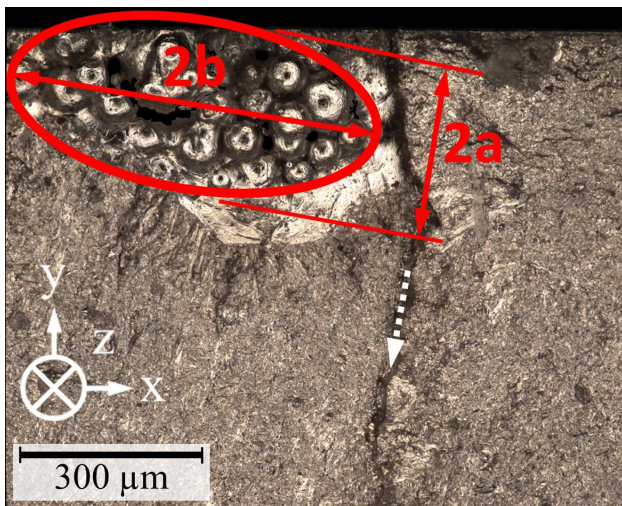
Characterisation technique used to quantify defect size at crack initiation sites based on approximate elliptical geometry of dimensions a, b . Crack propagation direction is indicated by the dotted white arrow. (Fracture surface shown is HIP'ed specimen E1, machined to a depth of 1.00 mm)
